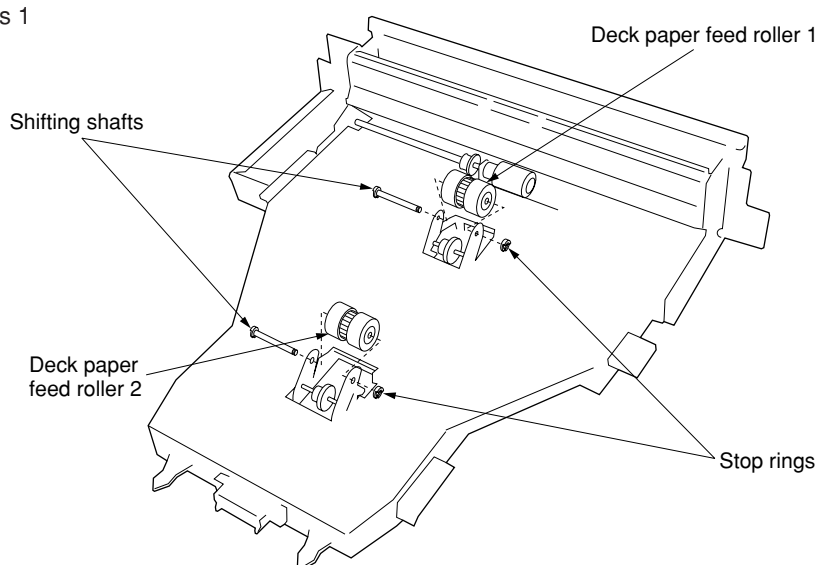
Detaching and refitting deck paper feed rollers 1 and 2
